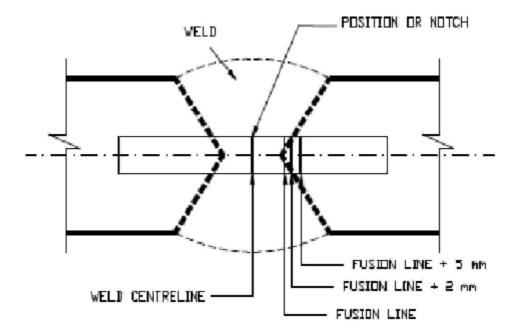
LOCATION OF CHARPY V-NOTCH SPECIMENS IN SAW PIPE WELDS
